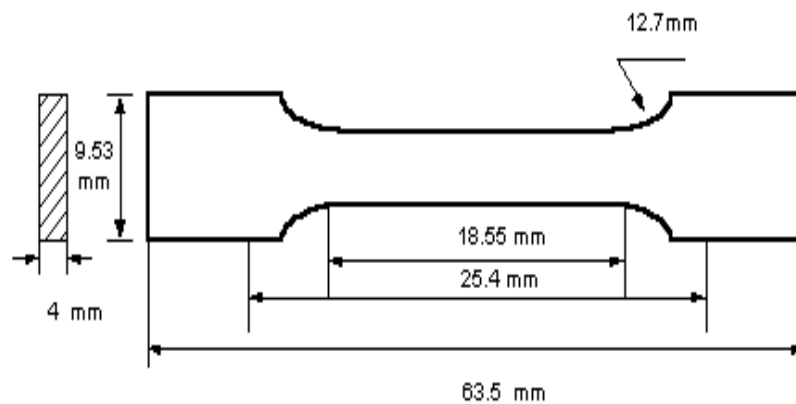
Tensile specimen as per ASTM D 638[61]
